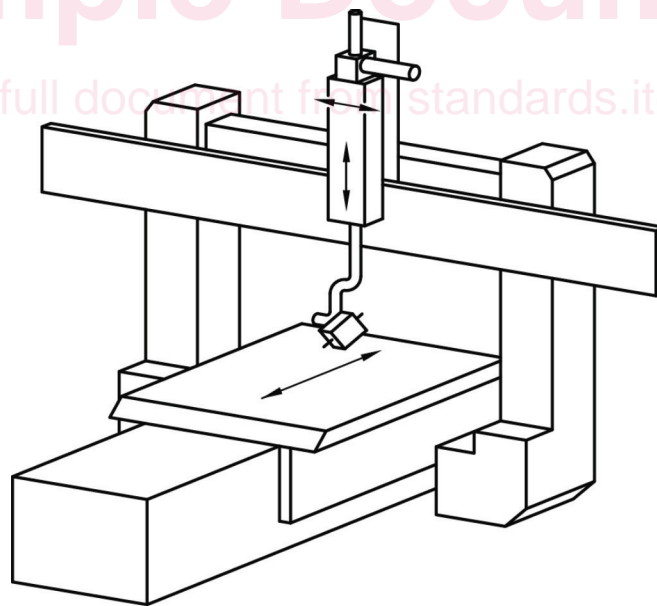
Example of a machine with moving table, fixed portal, moving machining head
